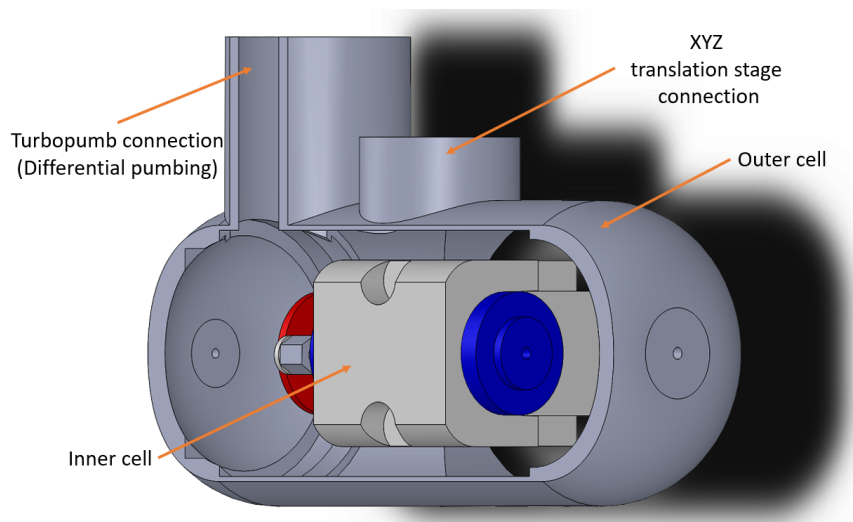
CAD view of the doubly differentially pumped gas cell.
